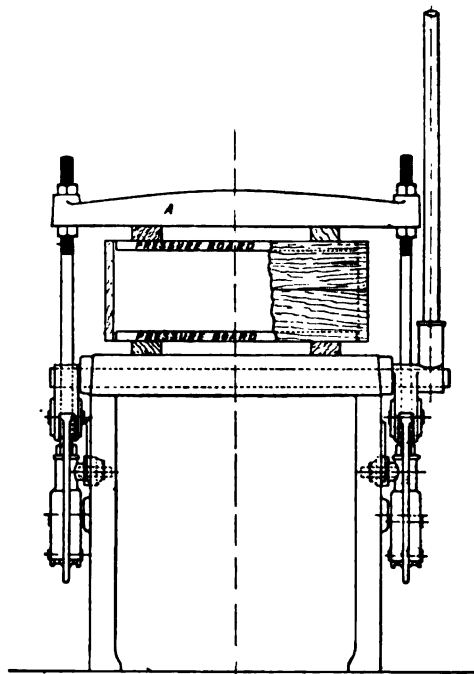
Hand Moulding Machine. (Samuelson & Co., Ltd.)
